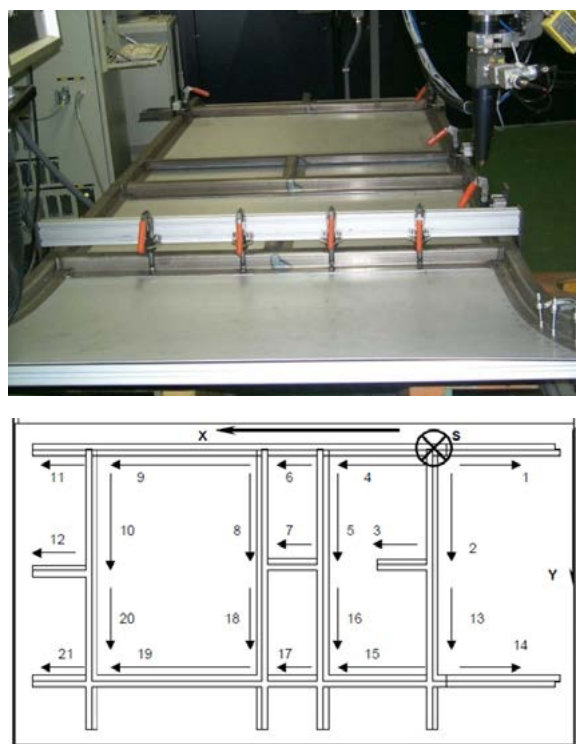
Test rig and welding sequence on the side wall demonstrator
